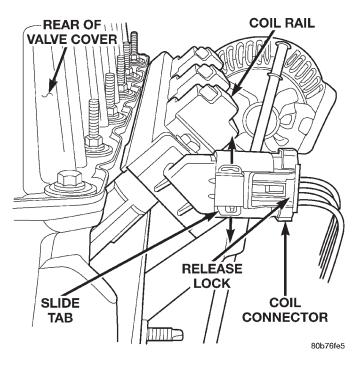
Ignition Coil Electrical Connector—4.0L 6–Cylinder Engine
